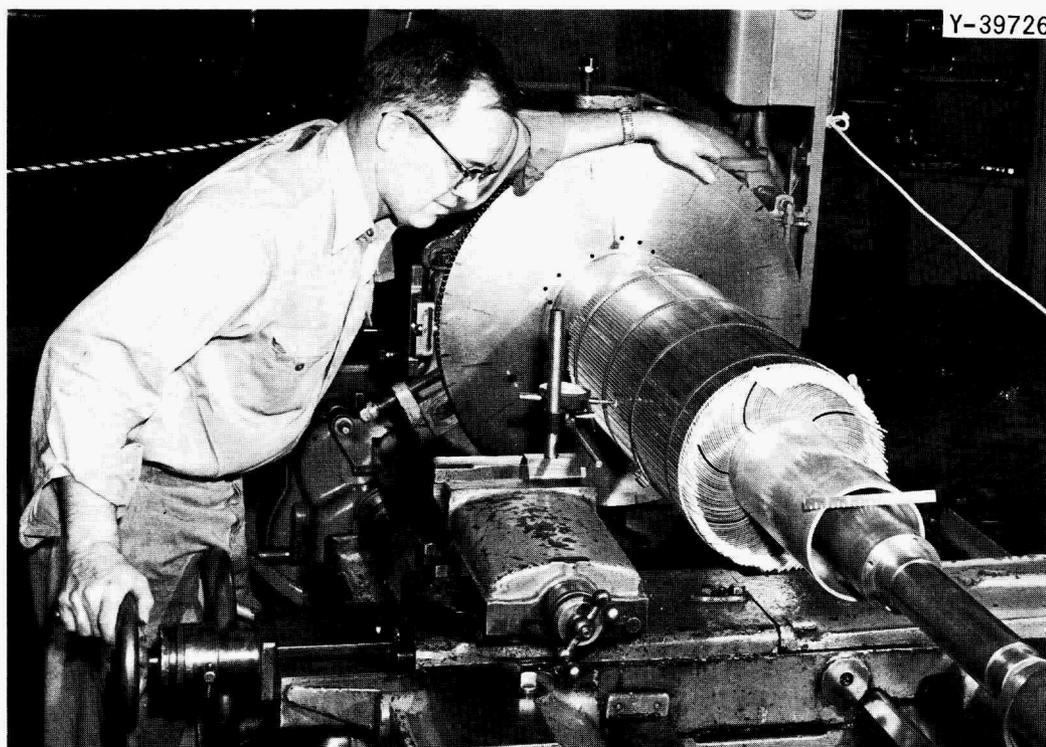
Inner Annulus Assembled, Shown During Measurement of Diameter.
